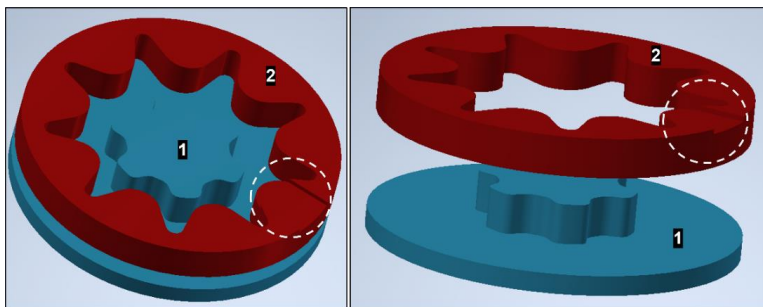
3: CAD model of the 9-tooth sprocket insert showing the two-part mold. A similar model was created for the hexagon nut.
